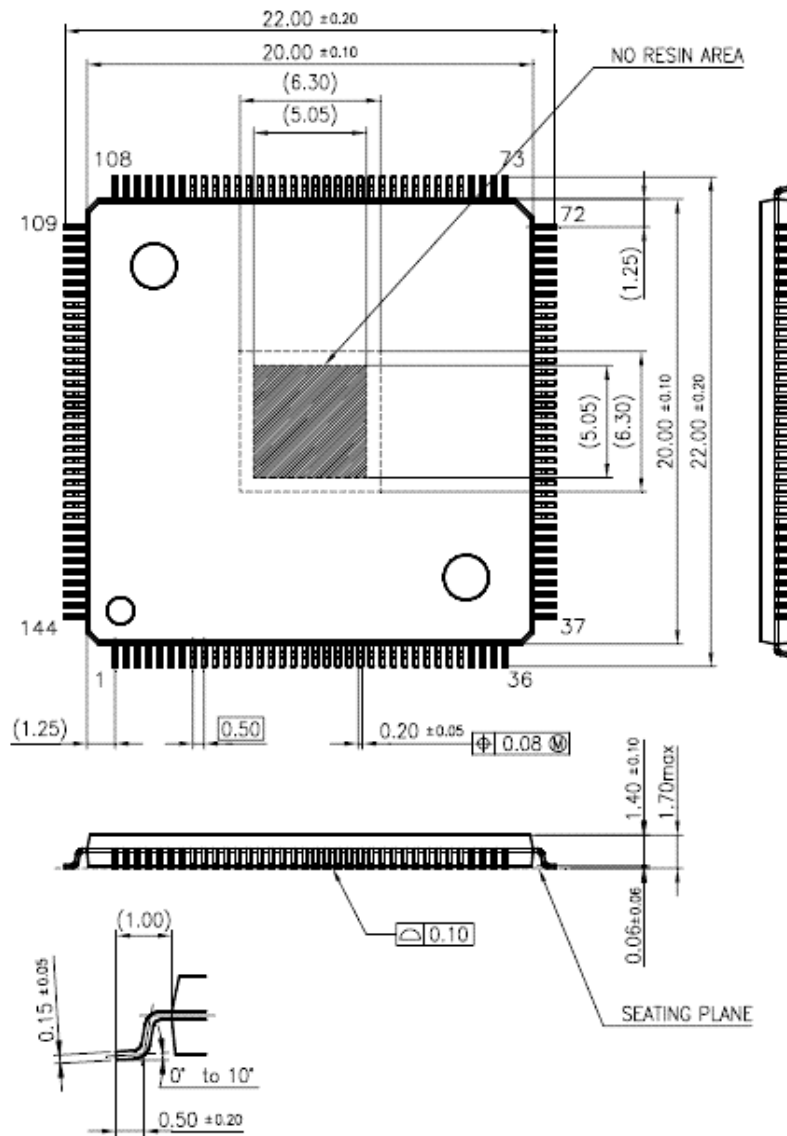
Package Dimension of HQFP144-20□ (unit: mm)
